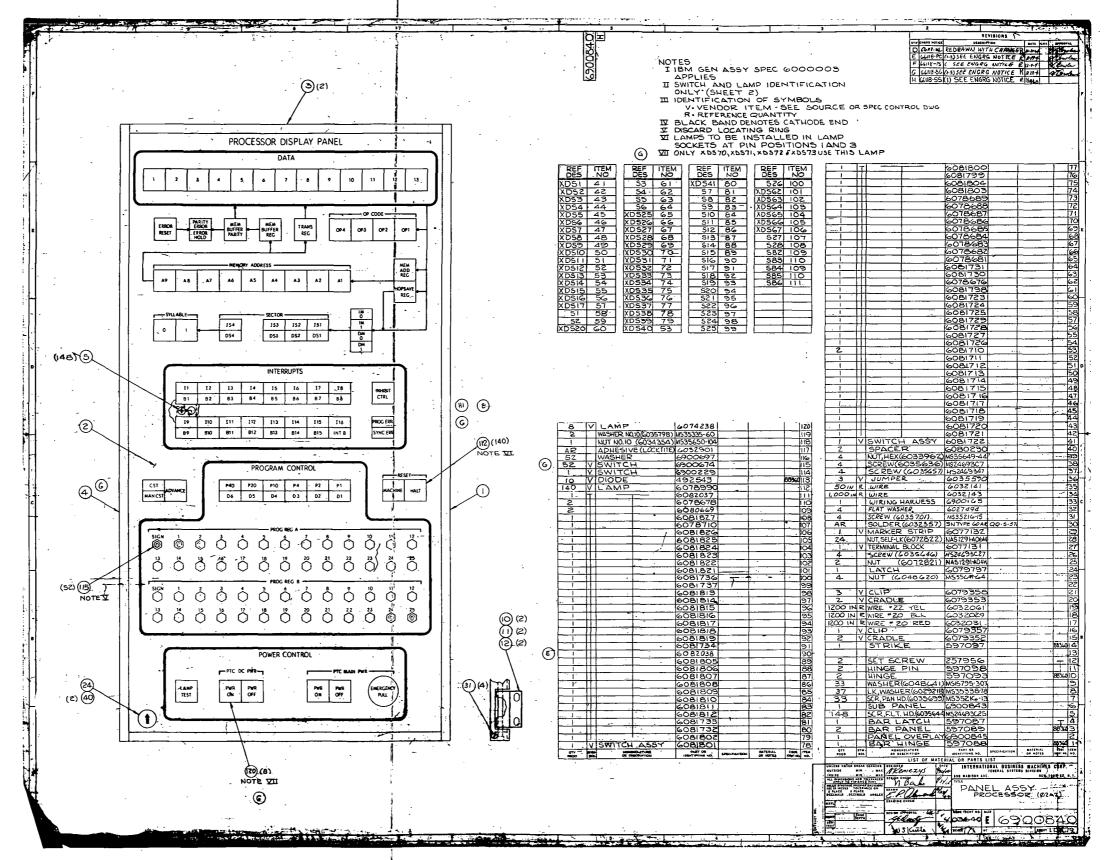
Processor Display Panel Assembly (02A2) Assembly Drawing (Sheet 1 of 2) V-10-184
